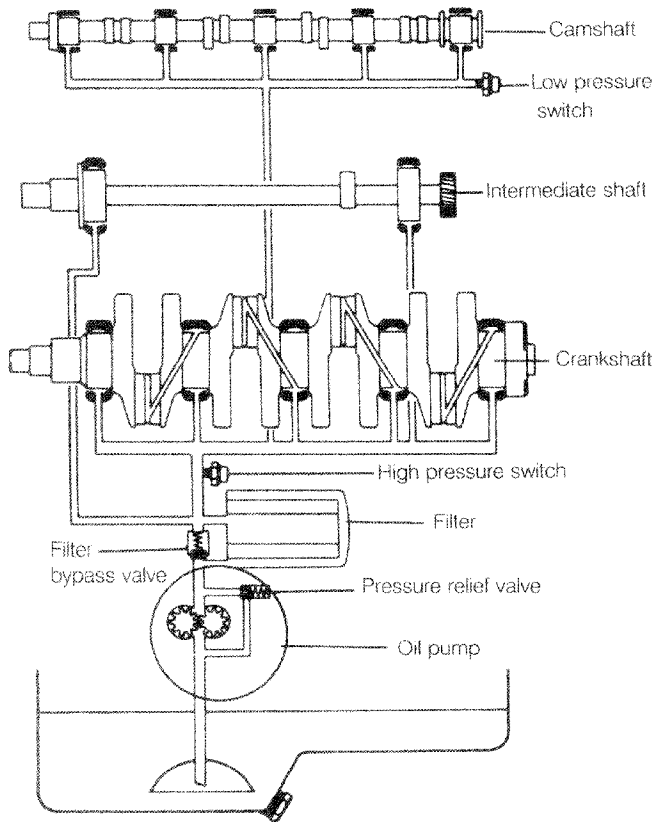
Schematic view of lubrication system. Pressure relief is part of pump. On 16-valve engines, both pressure switches are on oil filter flange.
